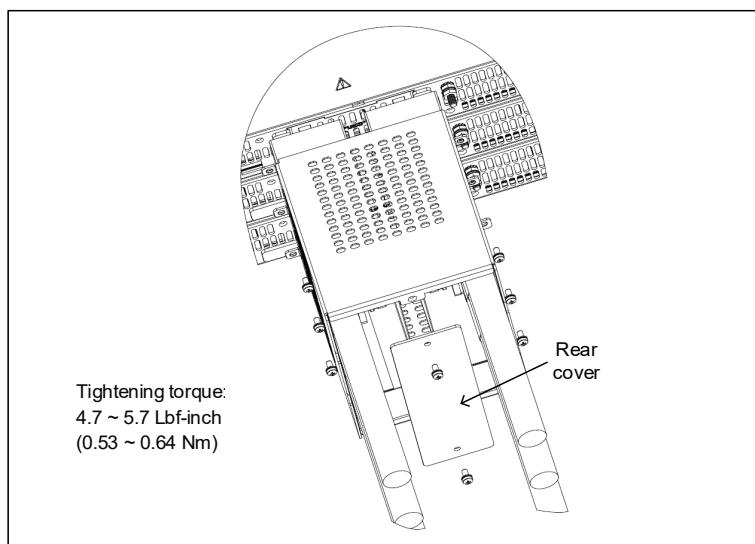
Assembly of 10V Wires Protection Insulator
